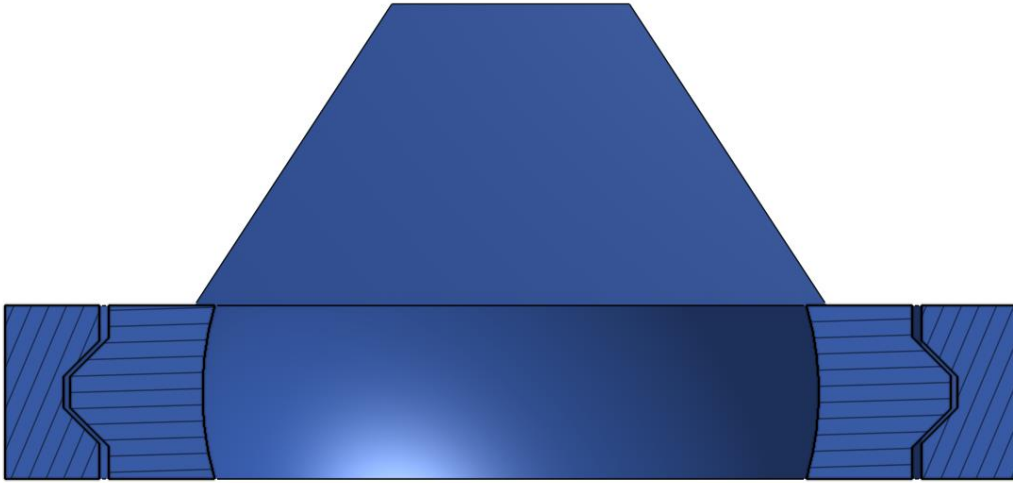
Cross-section of the ball joint assembly at the interface between the clamp and the body.
